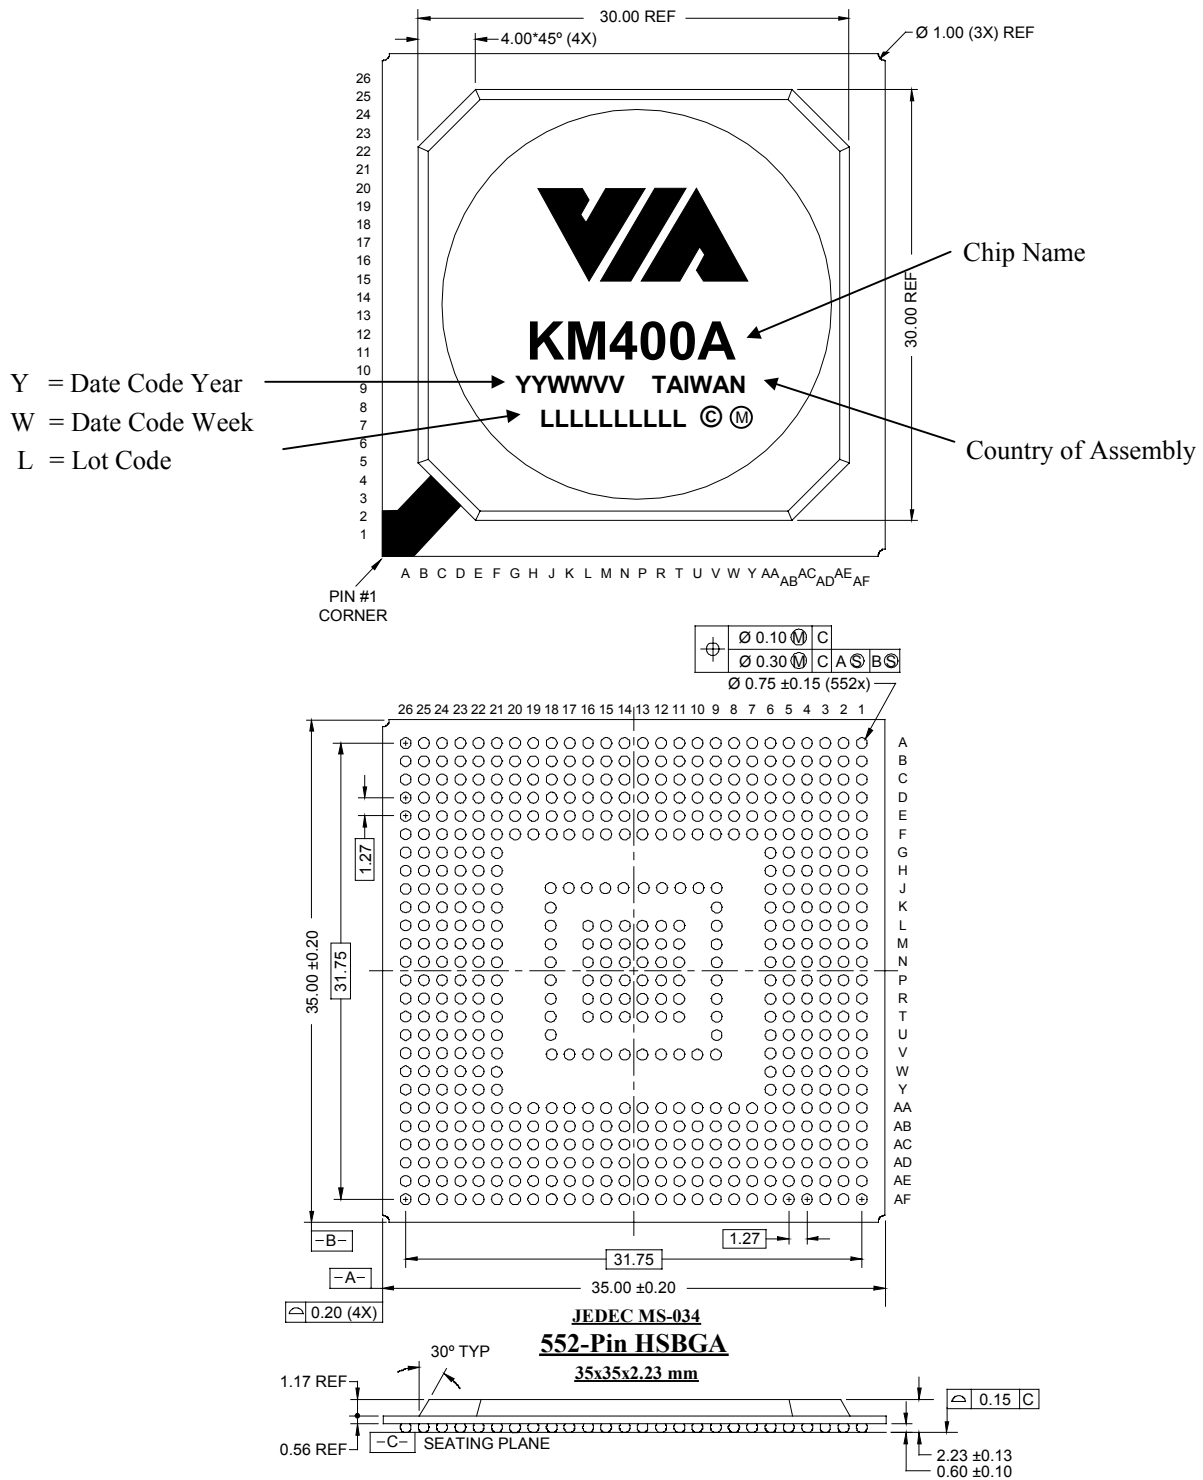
Mechanical Specifications - 552-Pin HSBGA Ball Grid Array Package with Heat Spreader
